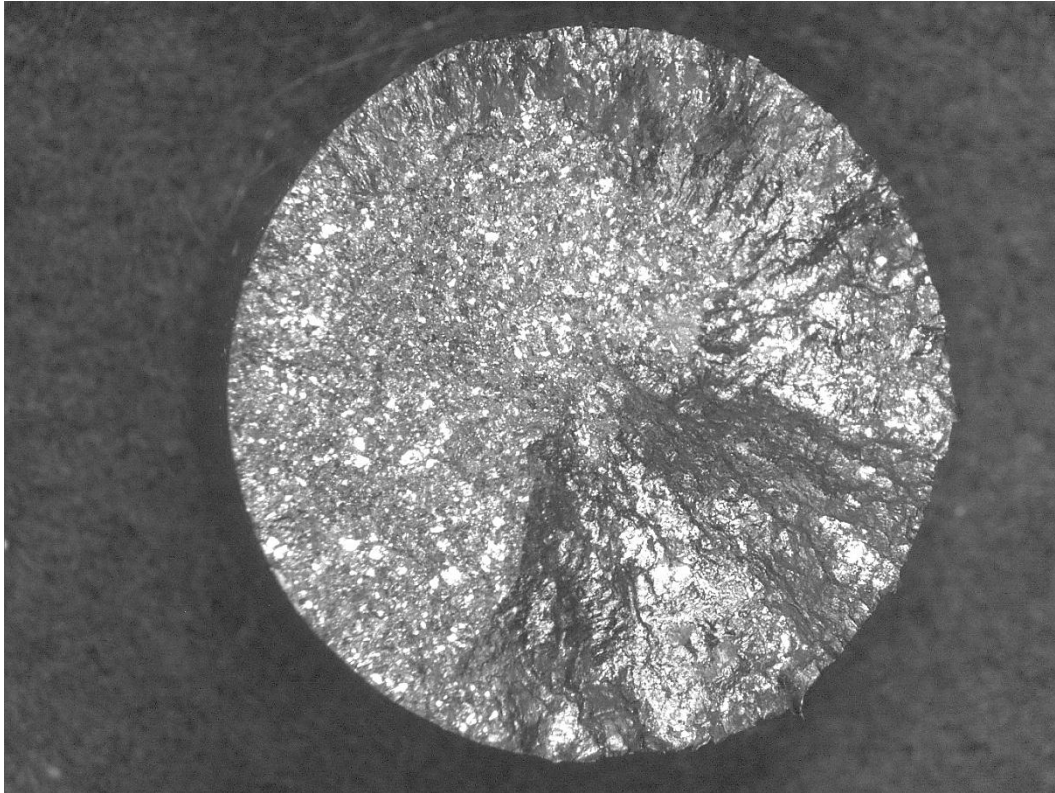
General photo of the fracture surface (Specimen 3.6)
